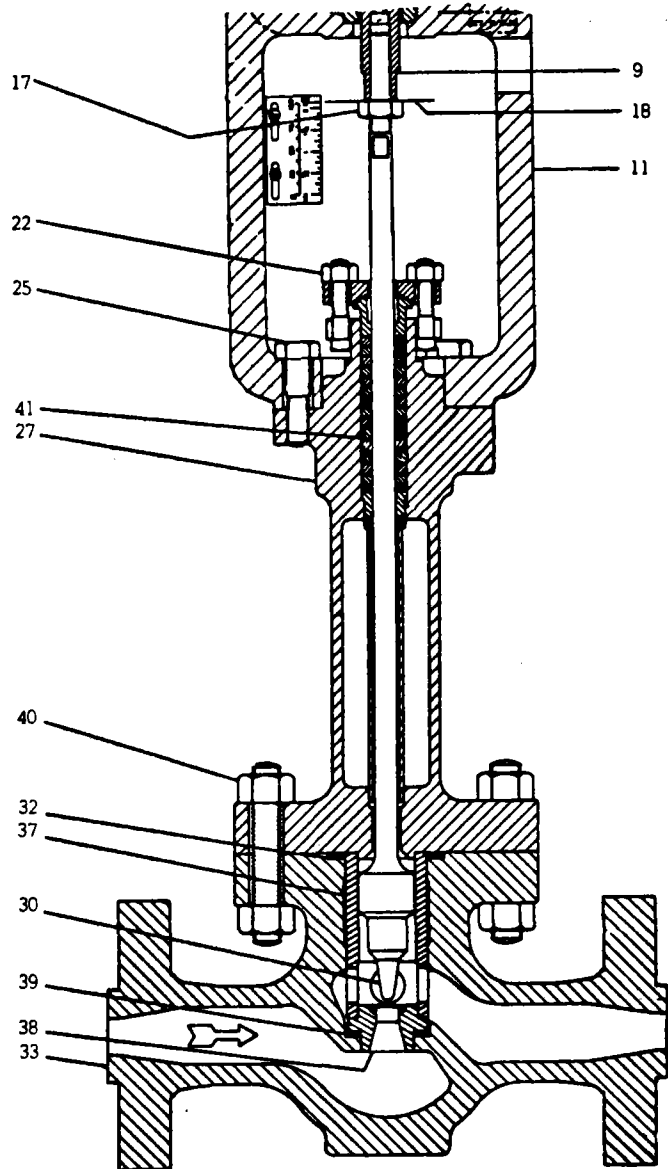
DOS, Cage Trim, Socket Weld End Type. May also be butt weld end, Flanged End or 90° Angle Type.
